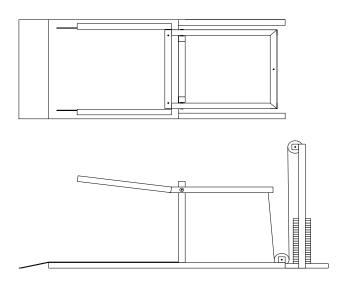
Top View (Top) and Side View (Bottom) of Rickshaw Machine.
